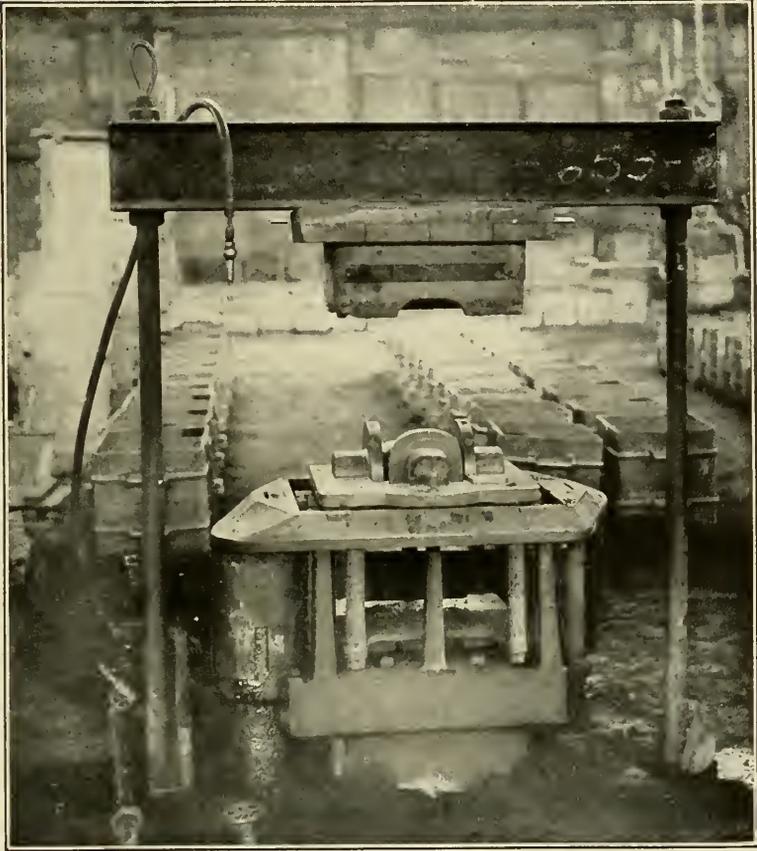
MOLDING MACHINE OPERATED BY COMPRESSED AIR.
